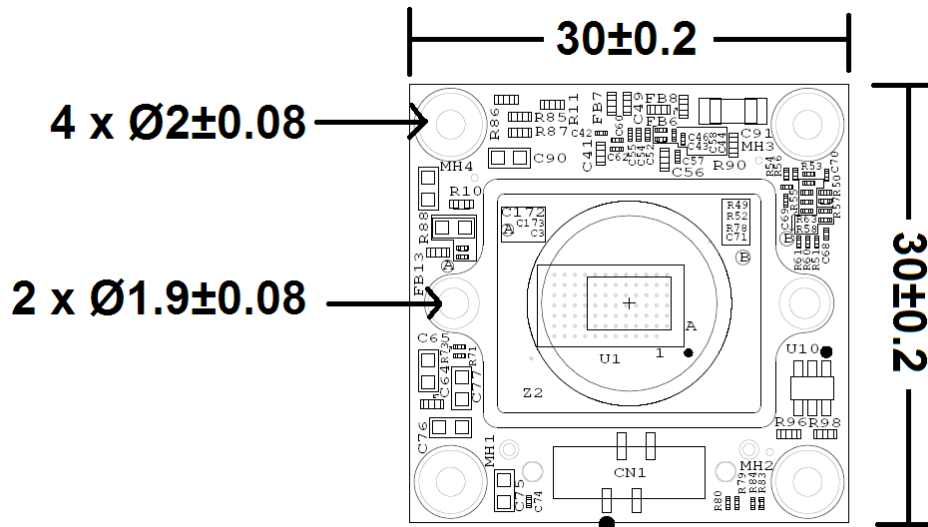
Top View of e-CAM217_CUMI0234_MOD Mechanical Drawing
